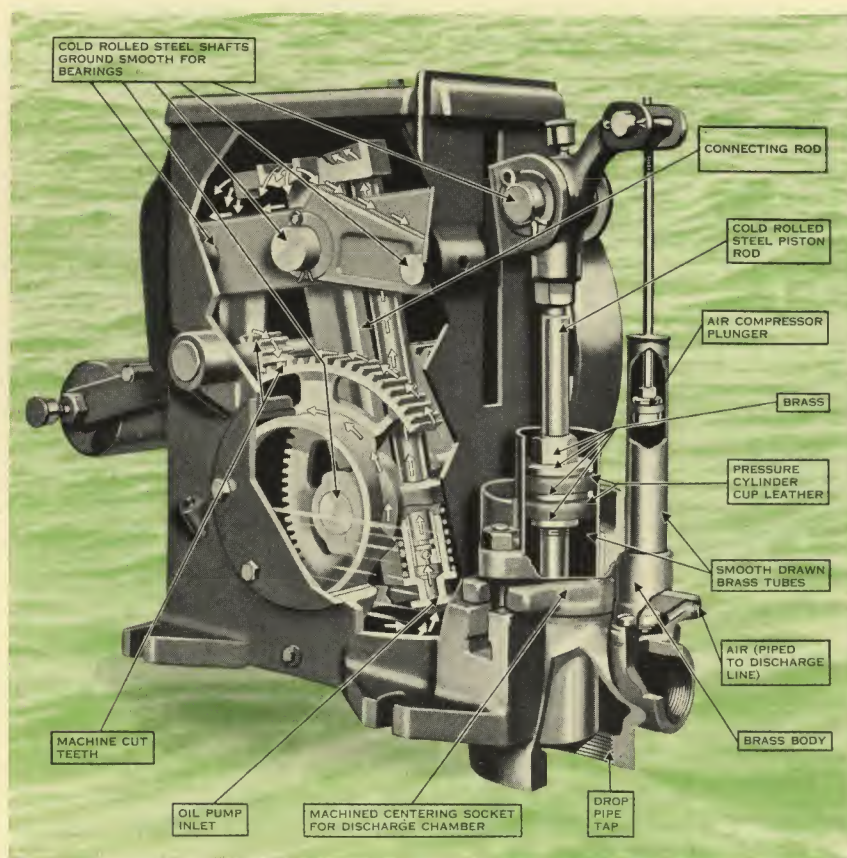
Cross sectional view of Fairbanks-Morse Type "C" Deep Well Pump Head, showing internal mechanism and oiling system.
